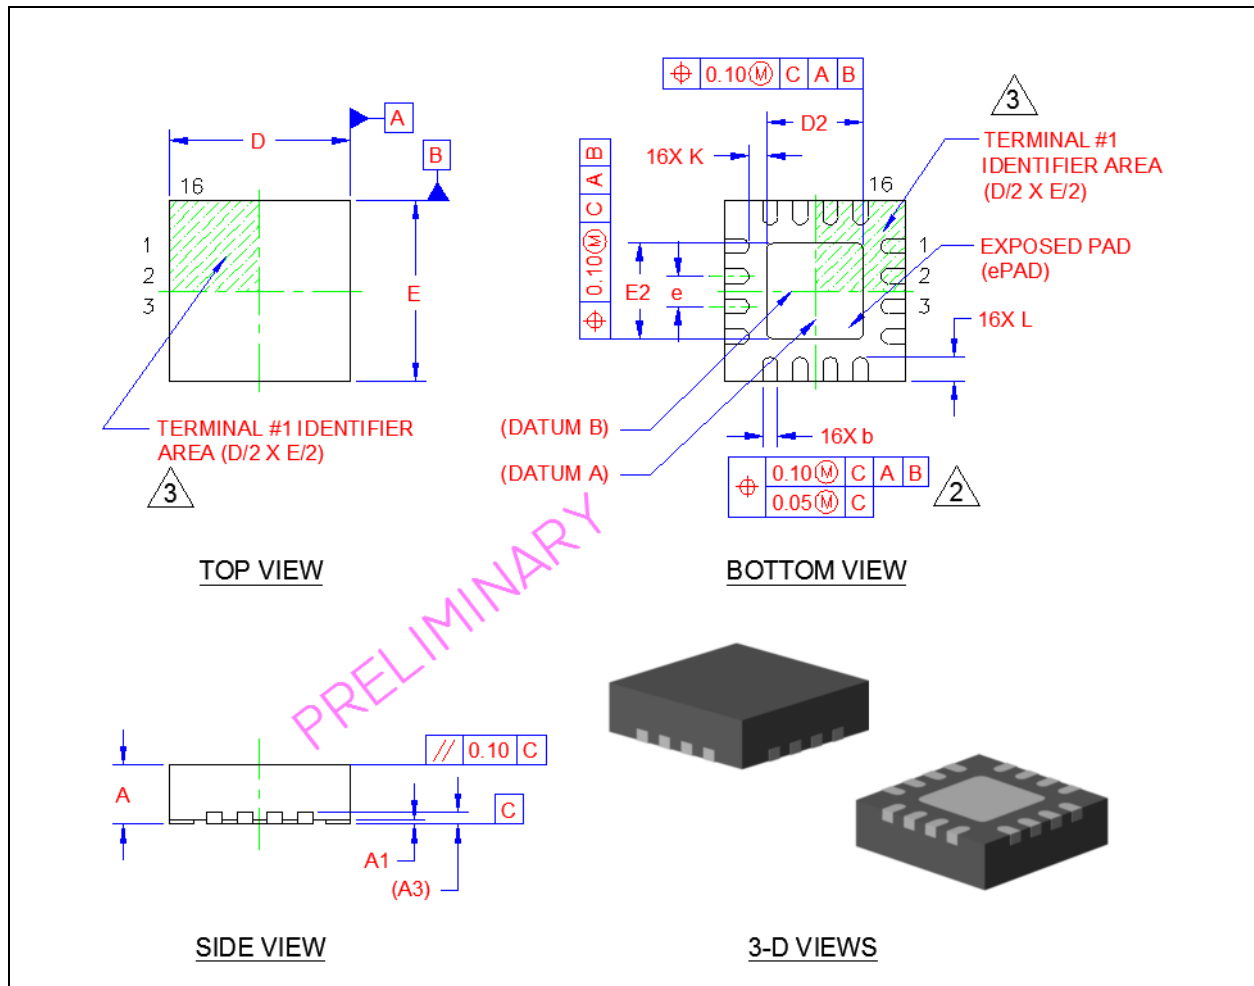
CAP1208 Package Drawing - 16-Pin QFN 3mm x 3mm
